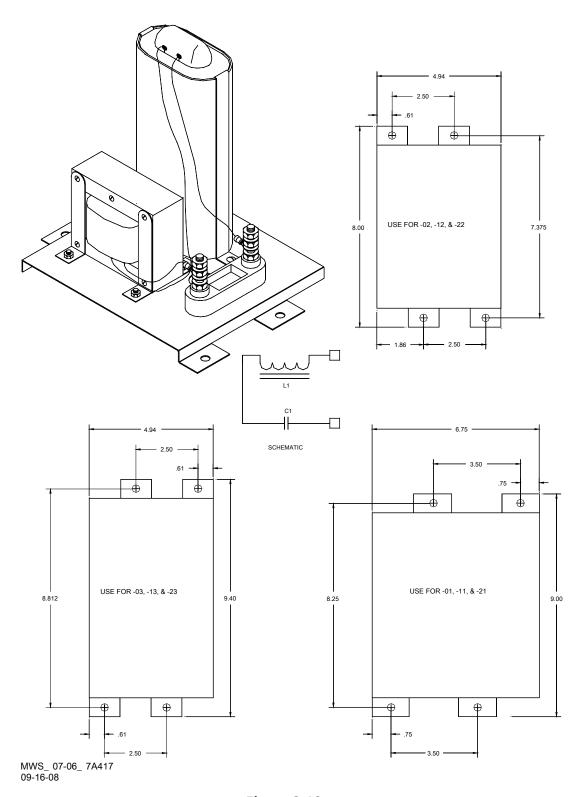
Cab Signal Filter, 7A417-X, with Mounting Dimensions
